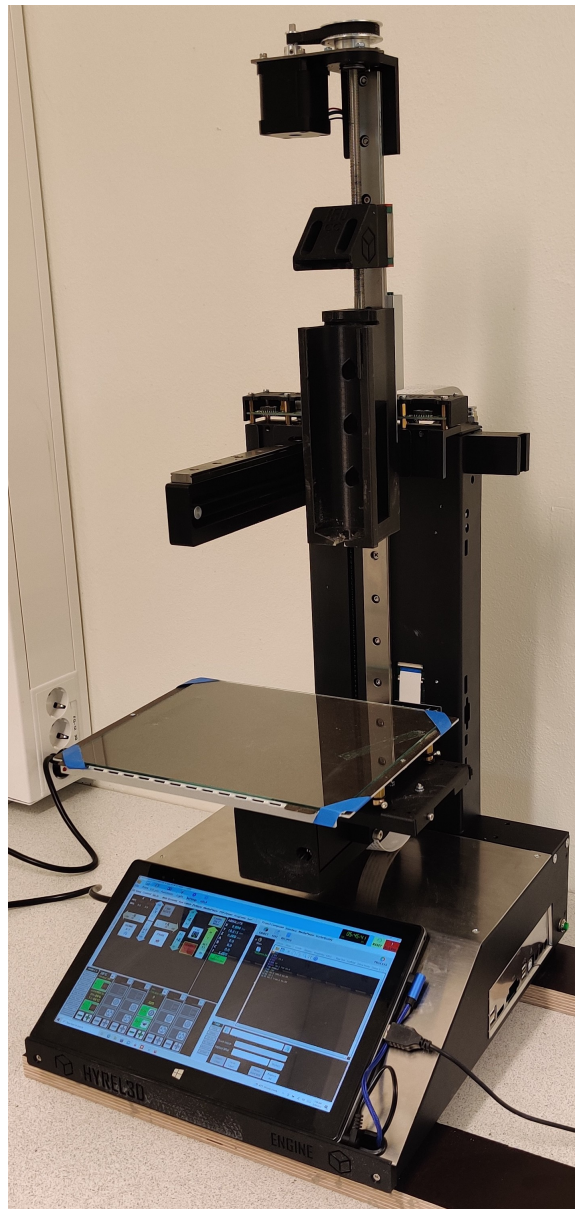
3D printer Engine SR from Hyrel 3D with print head SDS 150 connected
